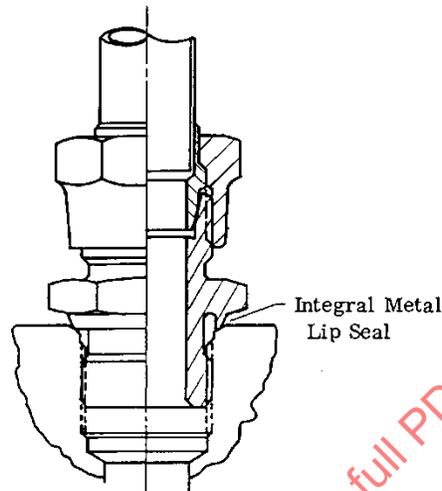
METAL SEAL TUBE-TO-COMPONENT FITTING
